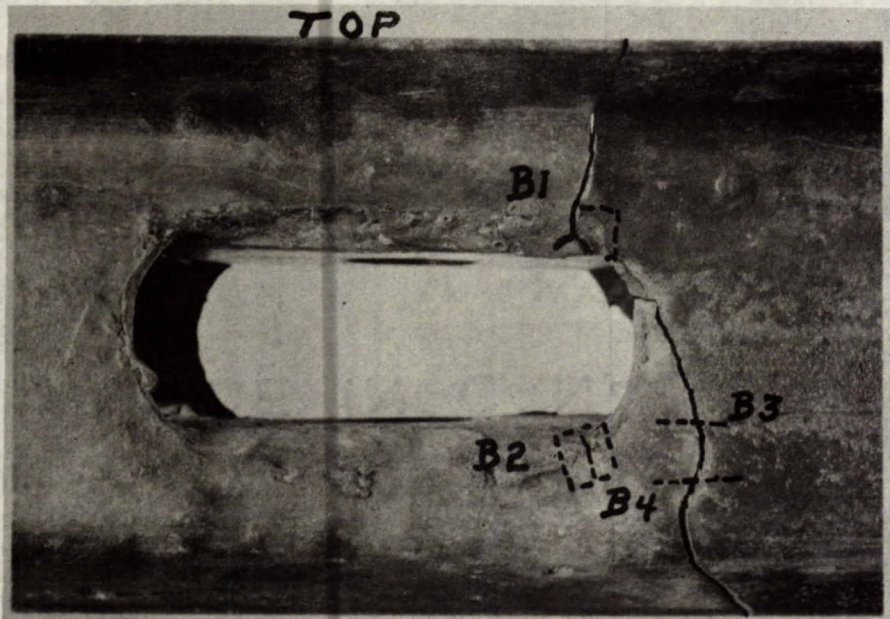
Side view looking at channel B with top side of channel at top of picture. The lower fracture path is not related to the outer fillet weld joining the lower connecting plate. As shown in Figures 3, 4, and 8, the fracture runs along the toe of the inner fillet weld which was made across the end of this plate. At its upper end, this fracture terminates at a notch in the flame cut slot. Although not involved in the failure, a crack, starting close to the right hand end of the outer lower fillet weld (actually the starting end of the weld), runs across the weld and about  $3/4$  in. downward into the web. This crack was faintly visible on the sample as received, as a result of rust staining. It was much more evident on magnetic particle examination after removal of the paint.
